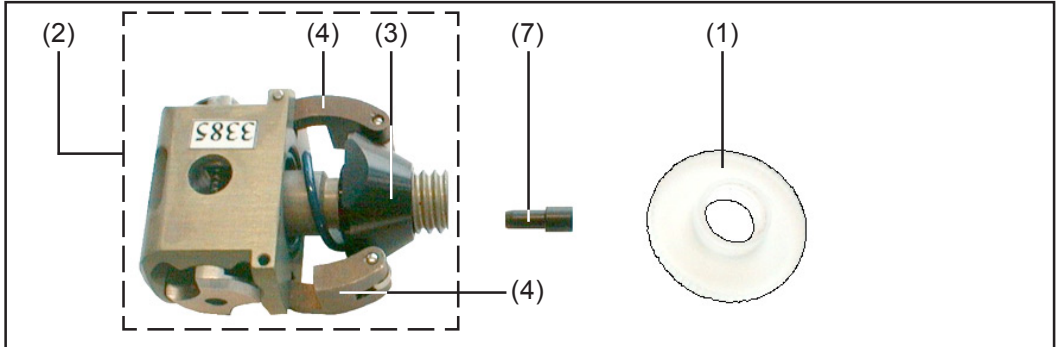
Unscrewing the knurled nut and detaching the taper clamping sleeve
